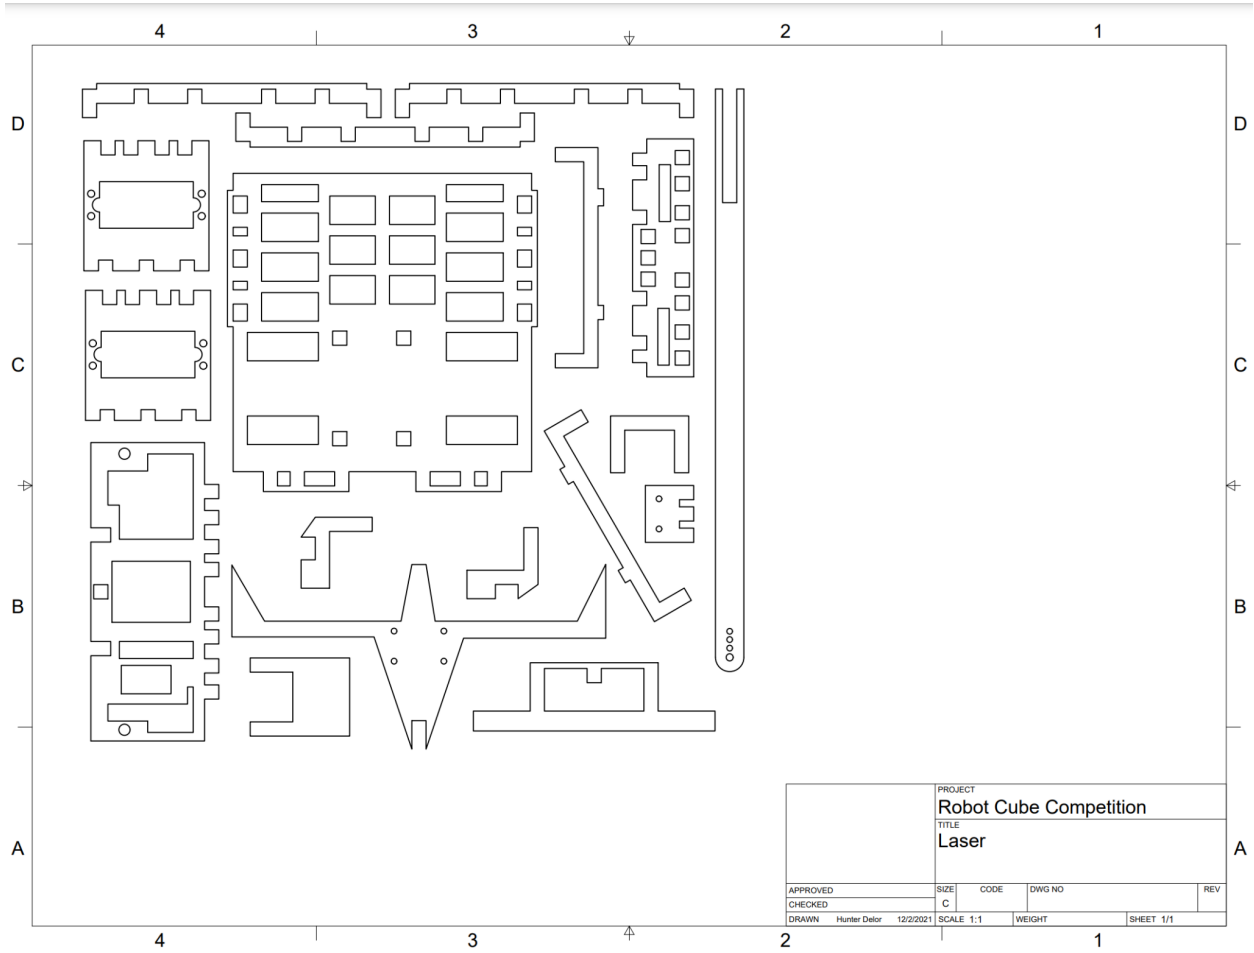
Drawing file of all the acrylic parts that make up the robot; laser cut by Cornell's Rapid Prototyping lab
